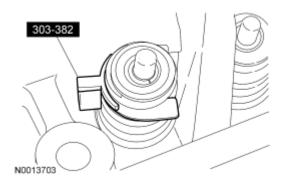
Installing Special Tool Between Valve Spring Coils Courtesy of FORD MOTOR CO.
